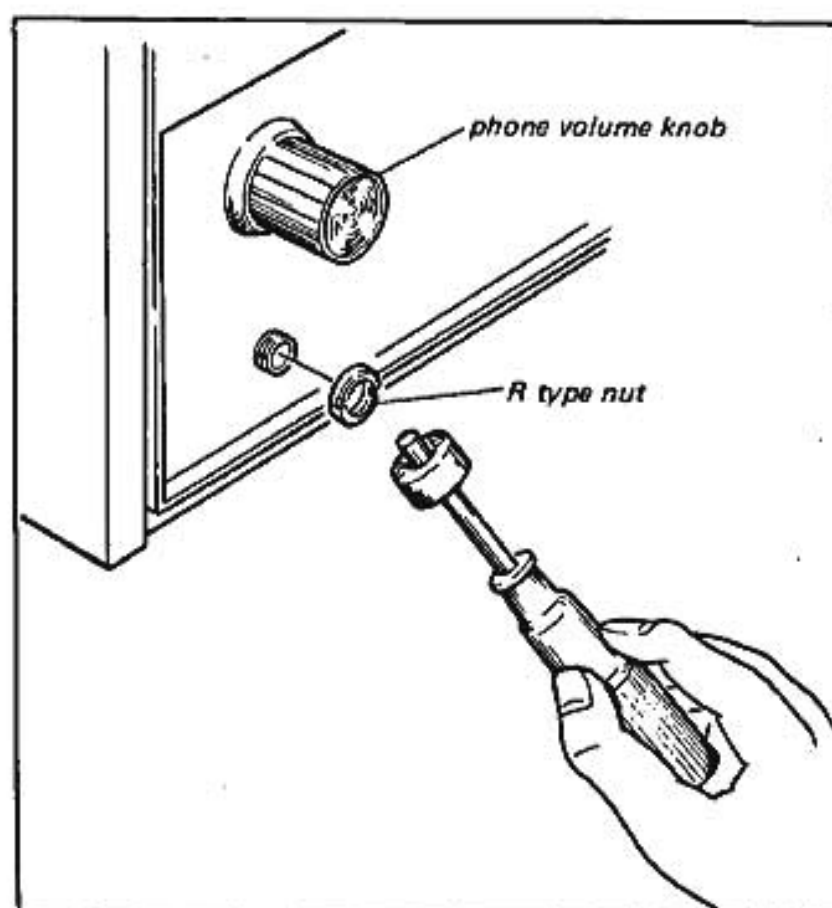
Screwdriver used for installing the headphone jack R type nut
